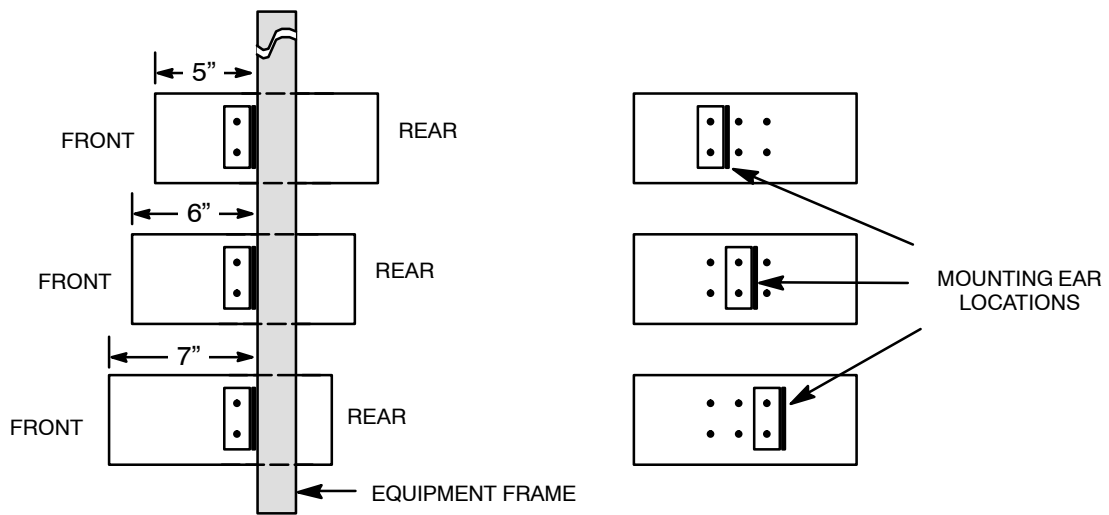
Equipment Horizontal Mounting—Channel Rack Applications
